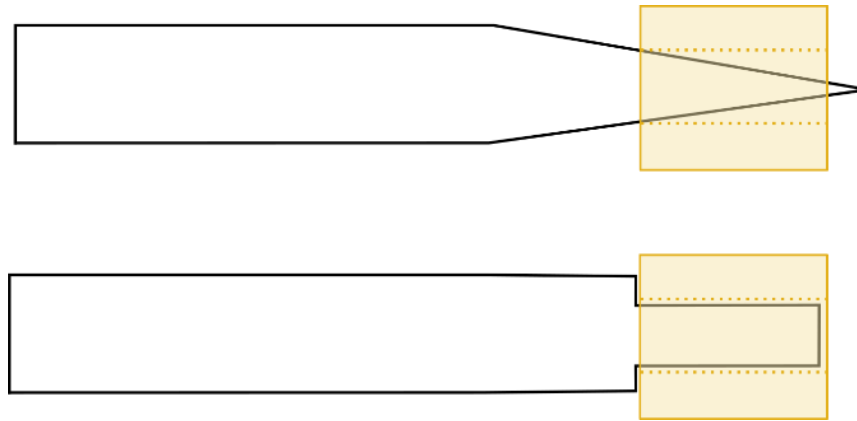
Typical soldering iron tip (top) compared to a purpose made threaded insert tip (bottom).
